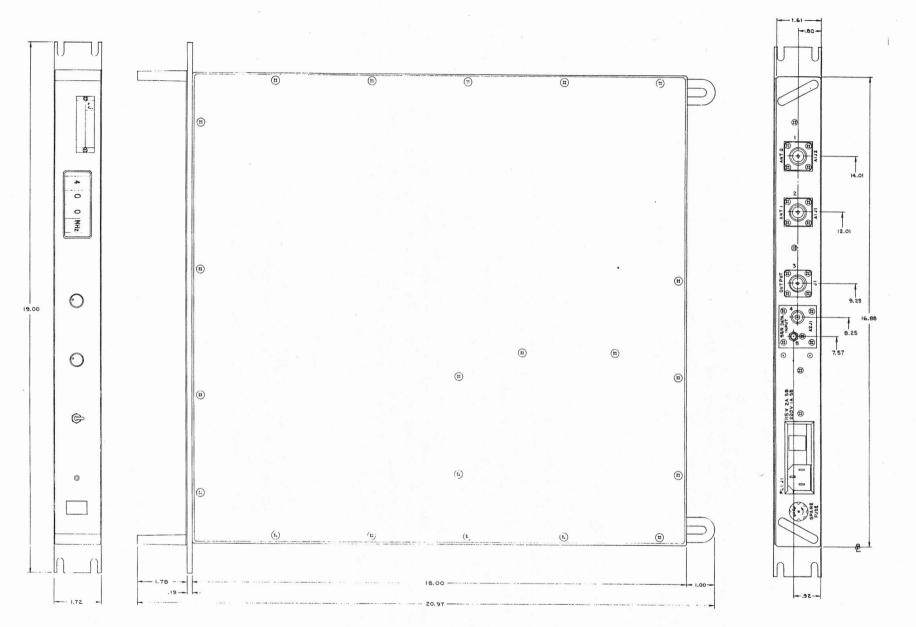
WJ-9073-2 Tracking Preselector Outline Drawing
